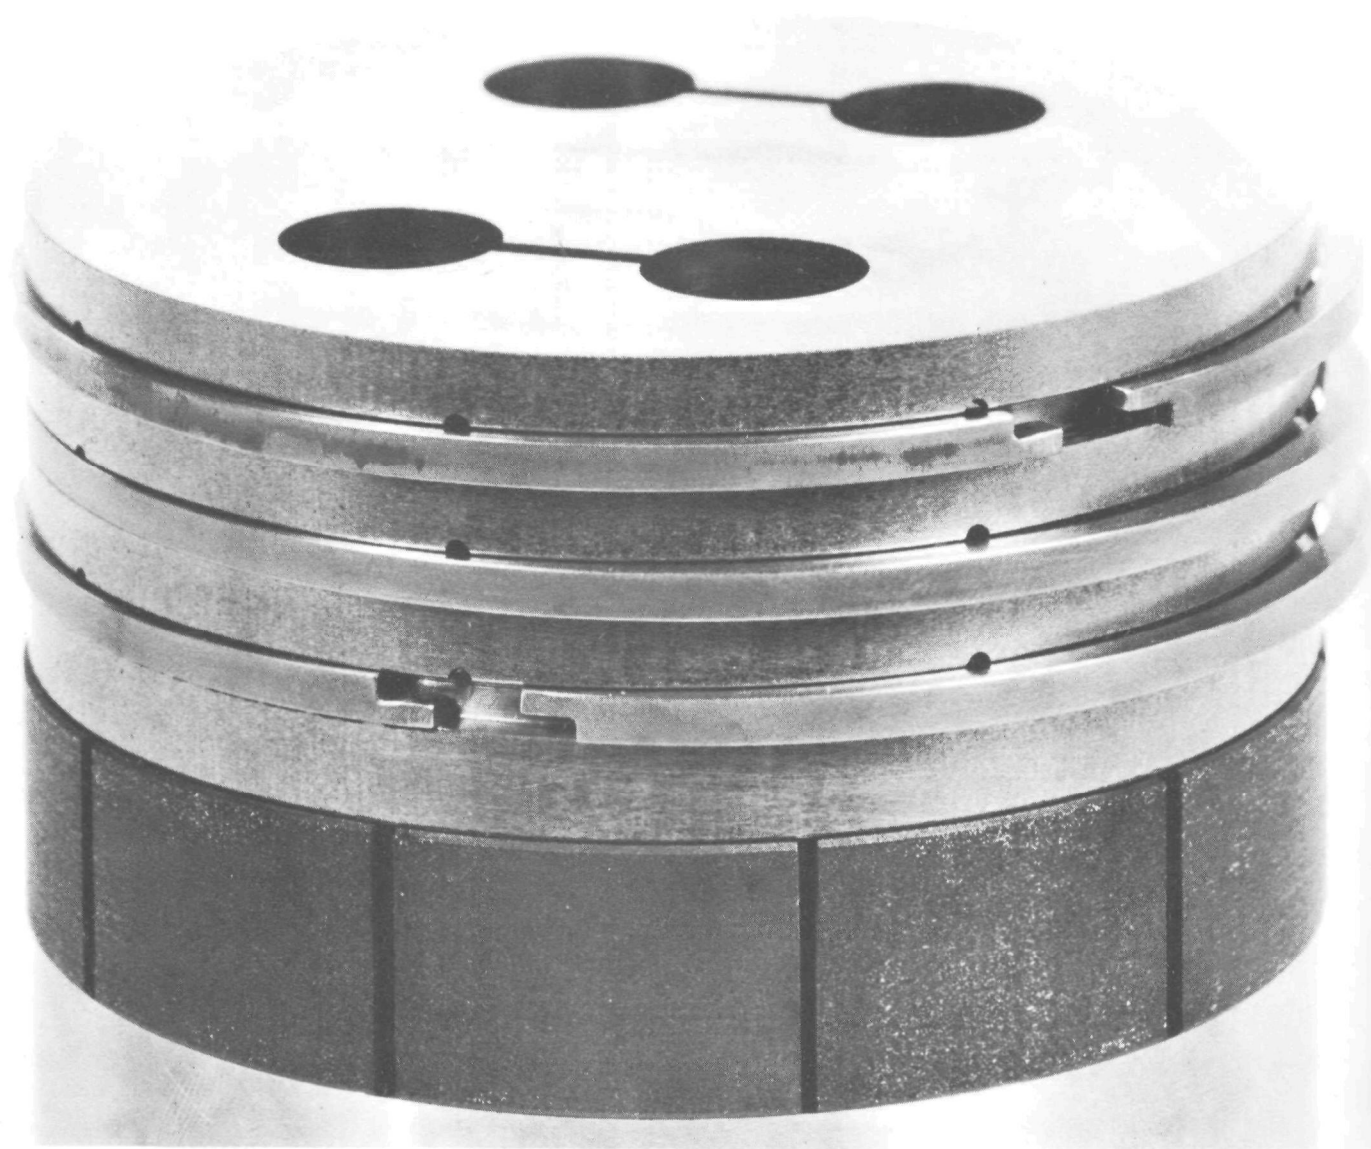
Trunk Expander Piston Assembly (P72-6-3A)
